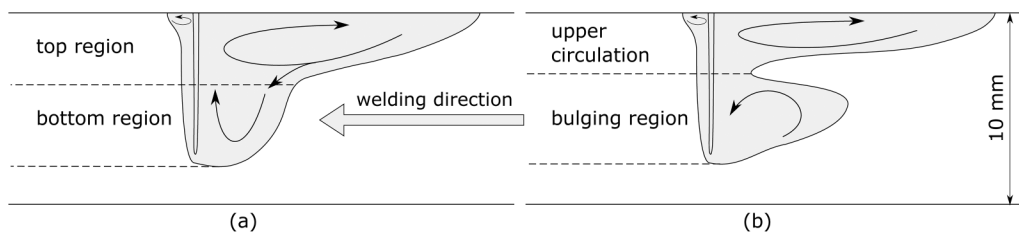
Comparison of different exemplary weld pool shapes for partial penetration welding. (a) Typical weld pool shape with three-dimensional flow routes across all areas. (b) Untypical weld pool shape with the narrowed region.
